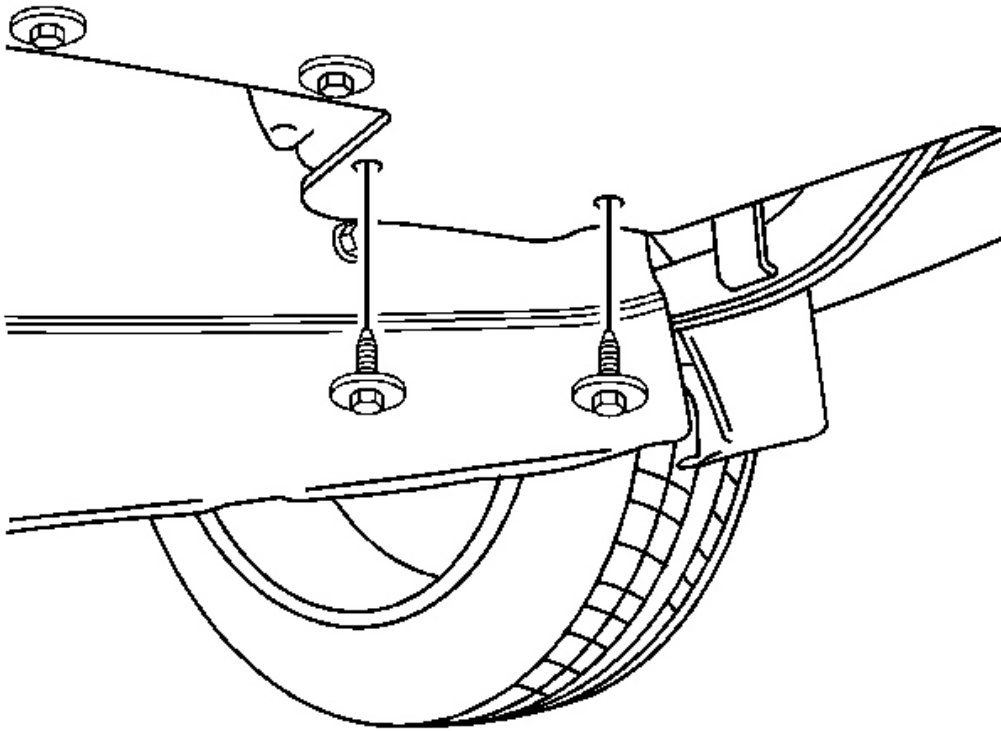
Removing/Installing Front Air Deflector Bolts
